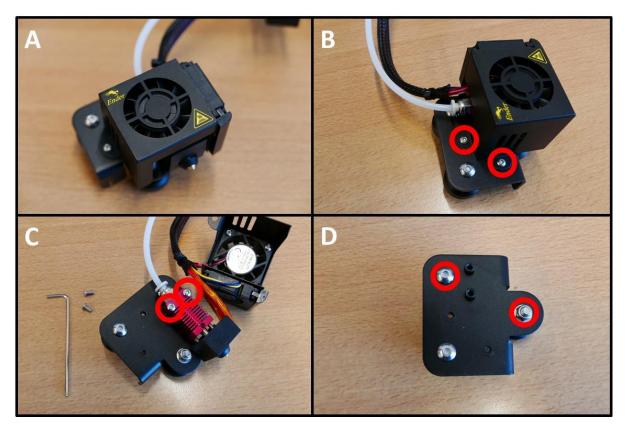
Preparing the E Plate for use in the pump. A) Extruder head overview. B) Removal of hotend shroud screws. These screws need to be saved for later use. C) Removal of the hotend. D) Loosening two screws in preparation for the Slider Mount.
